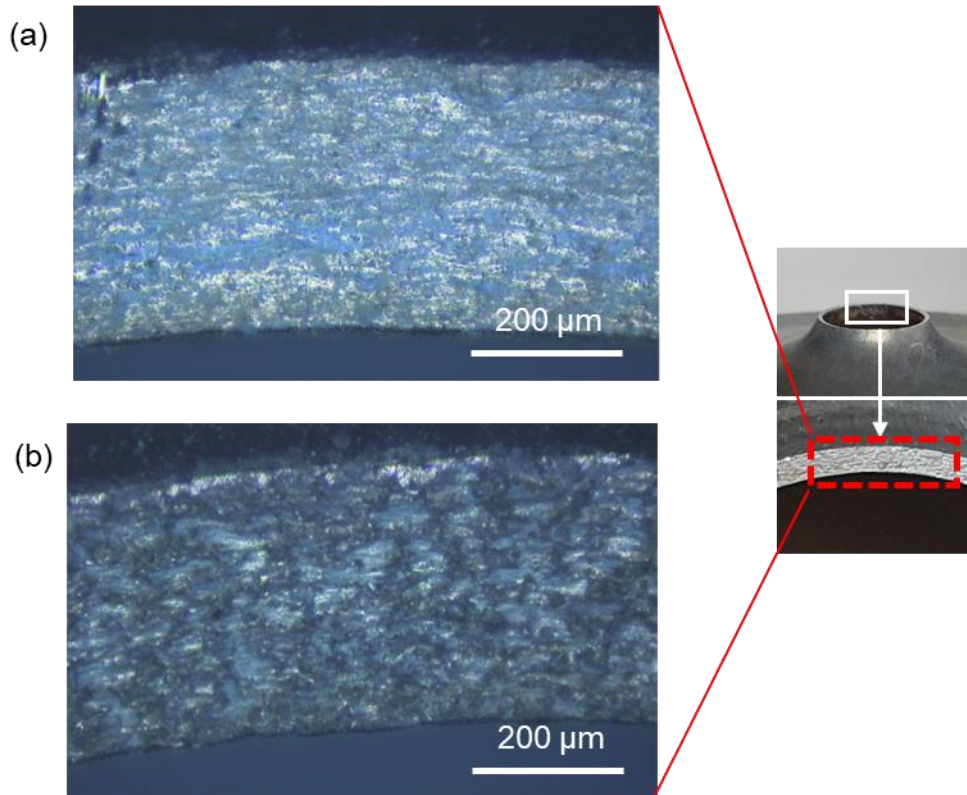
CLSM micrograph of edge part surfaces in fractured specimens of (a) punched specimen and (b) wire-cut specimen after completion of HE experiment.
